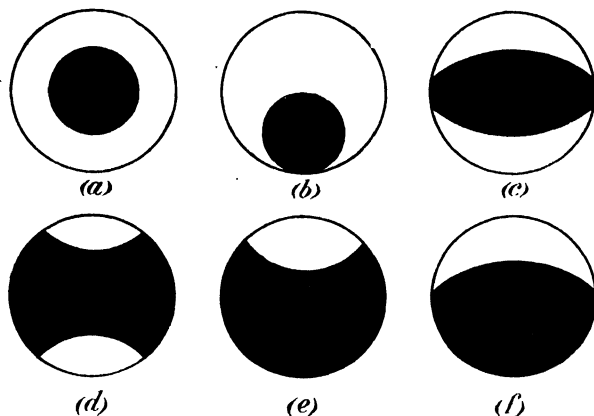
ILLUSTRATING TYPES OF FATIGUE FRACTURE
